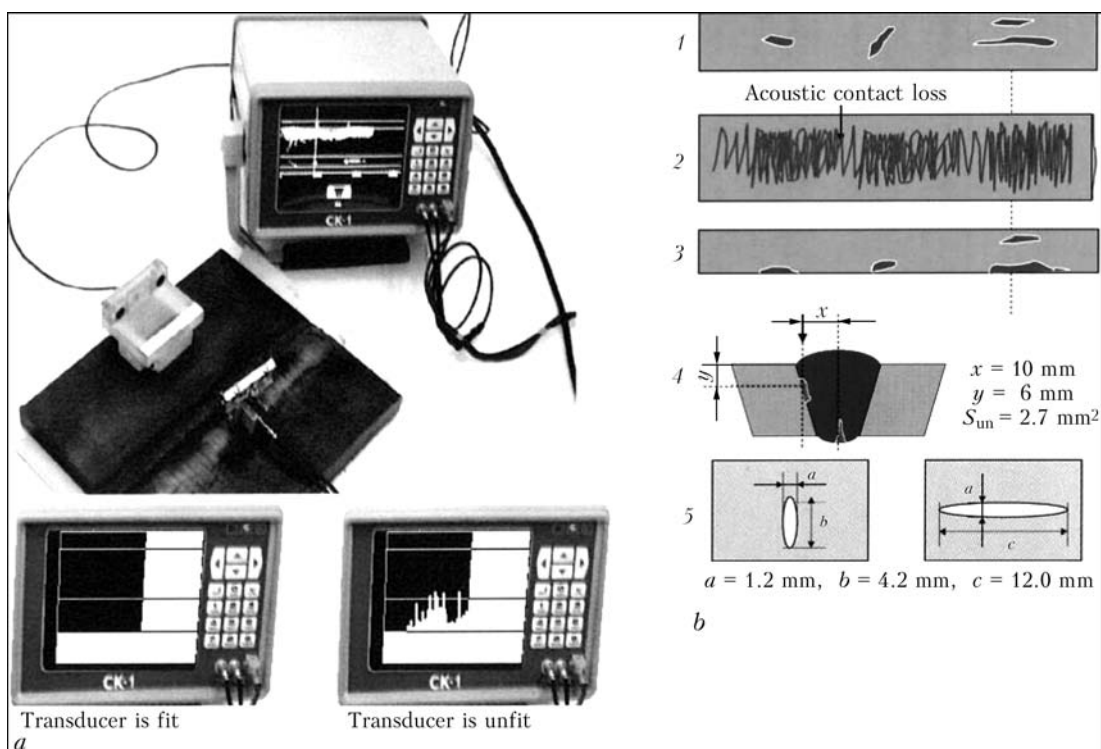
Multiprogrammed portable ultrasonic flaw detector SK-RDM: a – system self-control; b – defect information; 1 – top view; 2 – scanning trace; 3 – longitudinal weld section; 4 – transverse weld section; 5 – tomographic image of the defect
